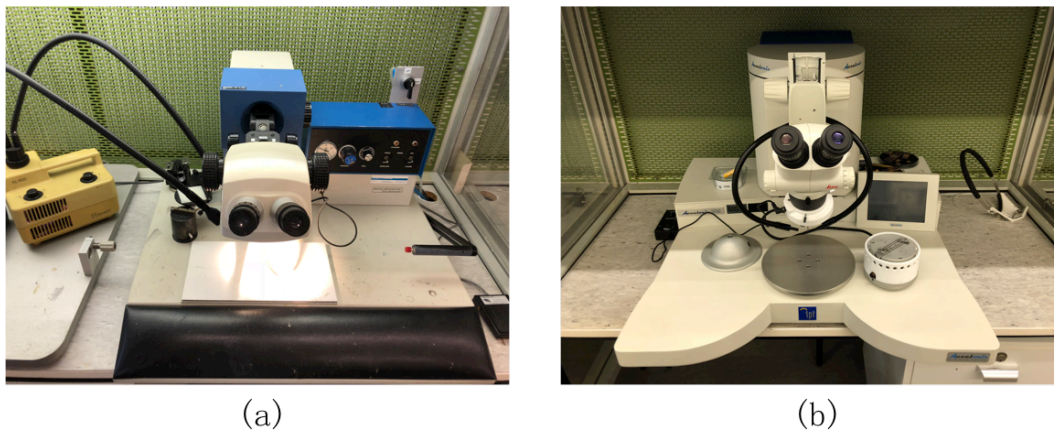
Bonding machines in MEMS Lab. (a) Pick and place machine; (b) Wire bonding machine.
